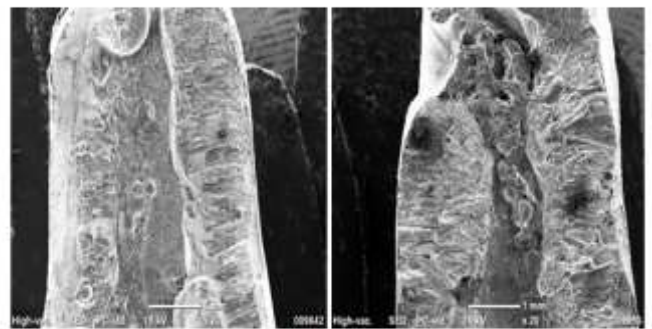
SEM fractographs of the top surfaces of welded specimens; (a) Before heat treatment; (b) After heat treatment.
